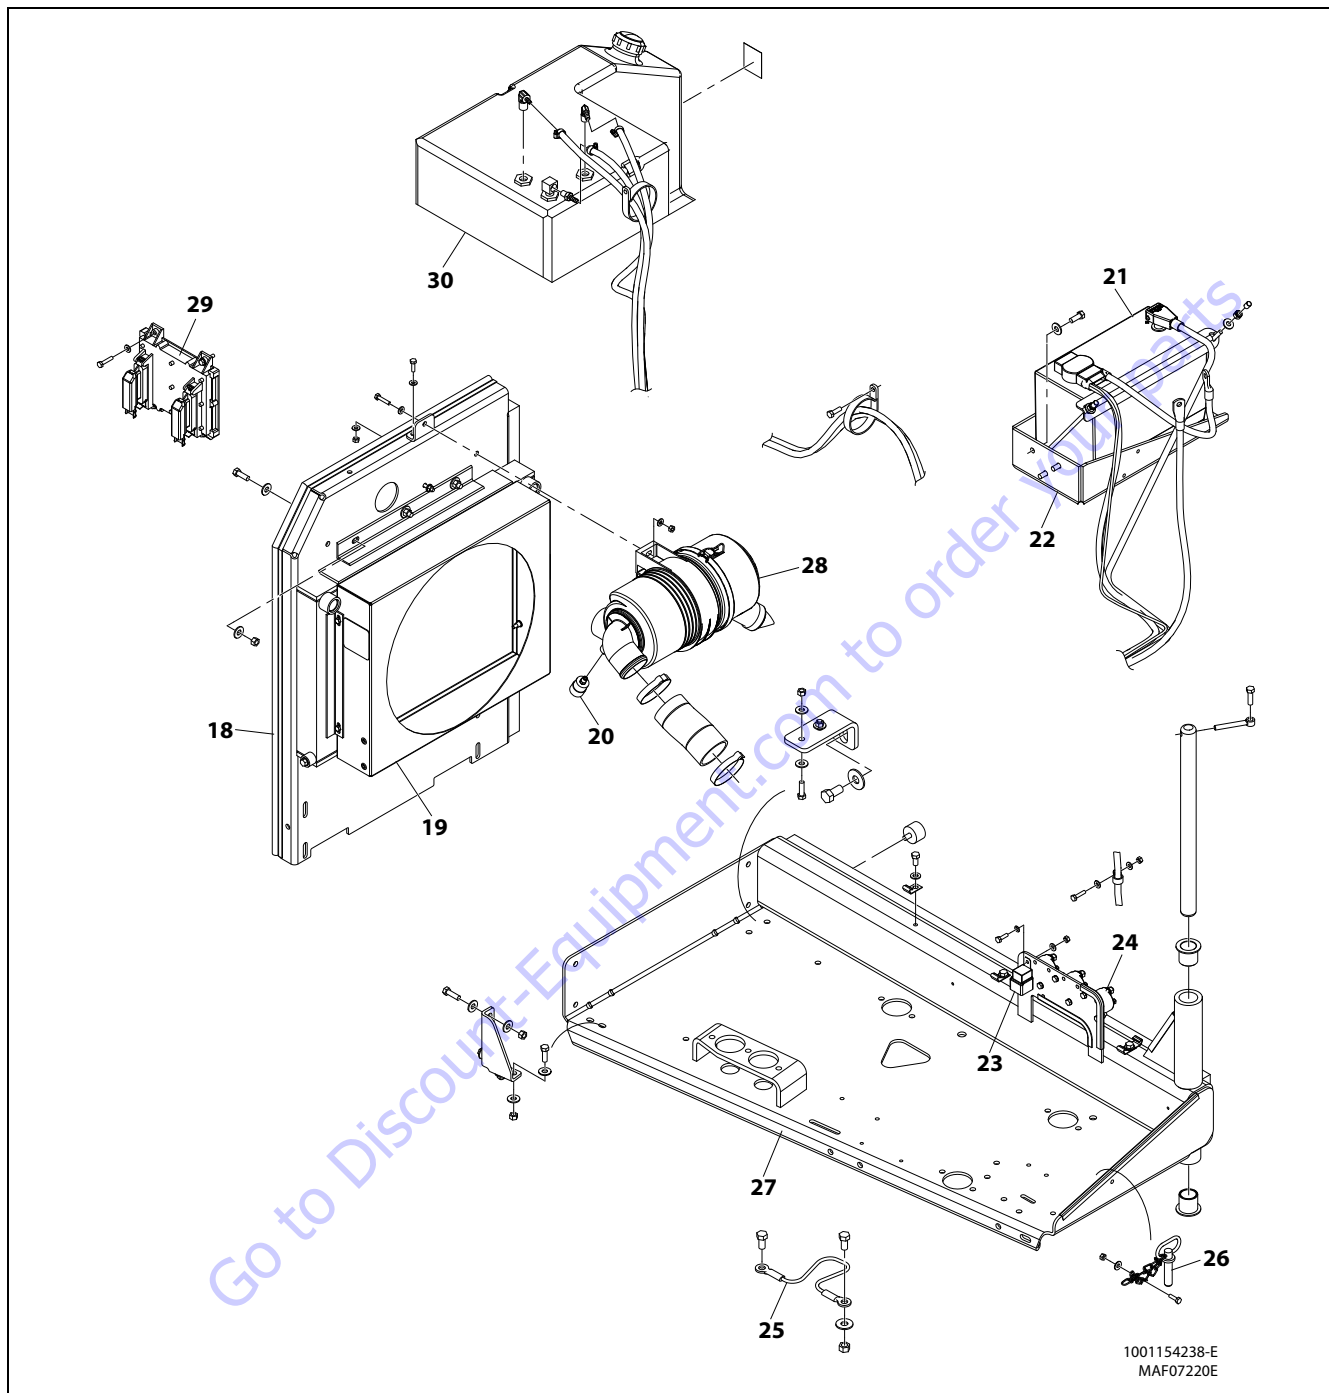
Deutz TD2.9L4 China III Engine Installation - Sheet 7 of 7
